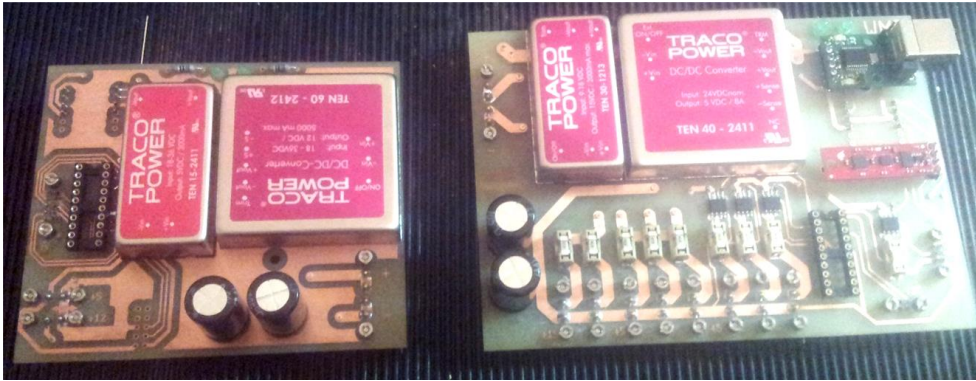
Arm Power Board (Left) and Main Power Board (Right)
